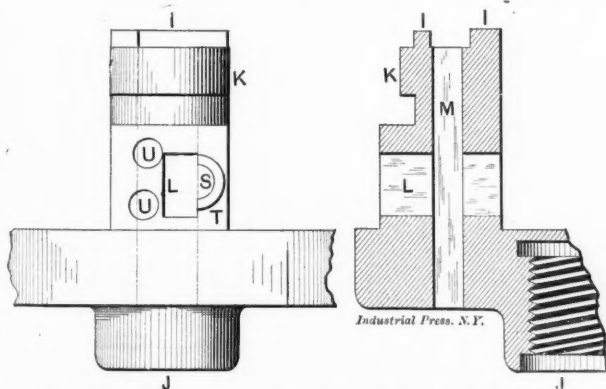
Details of Body of Chuck, showing Broached Holes for Jaw and Wedge.
